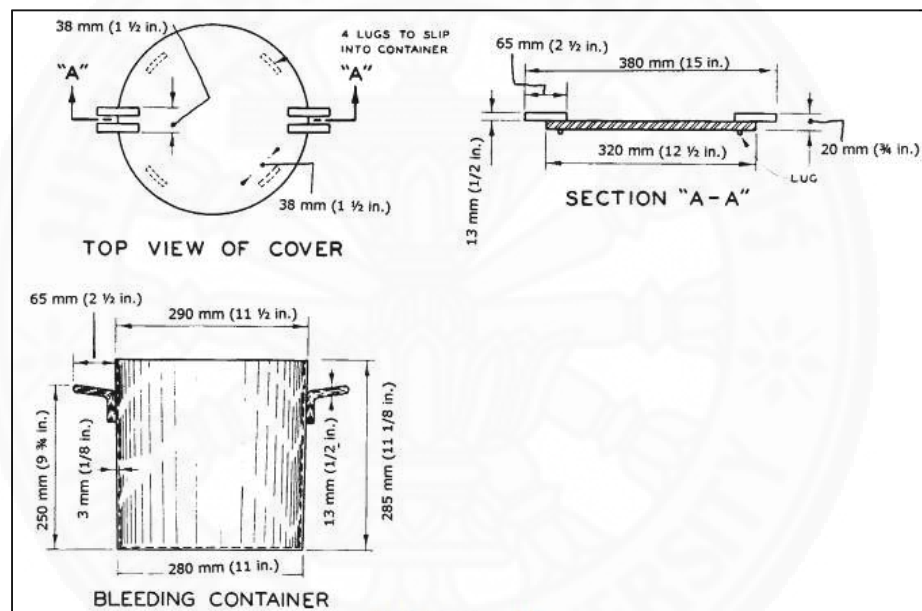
A cylindrical container for bleeding test (ASTM C232, 1999)
